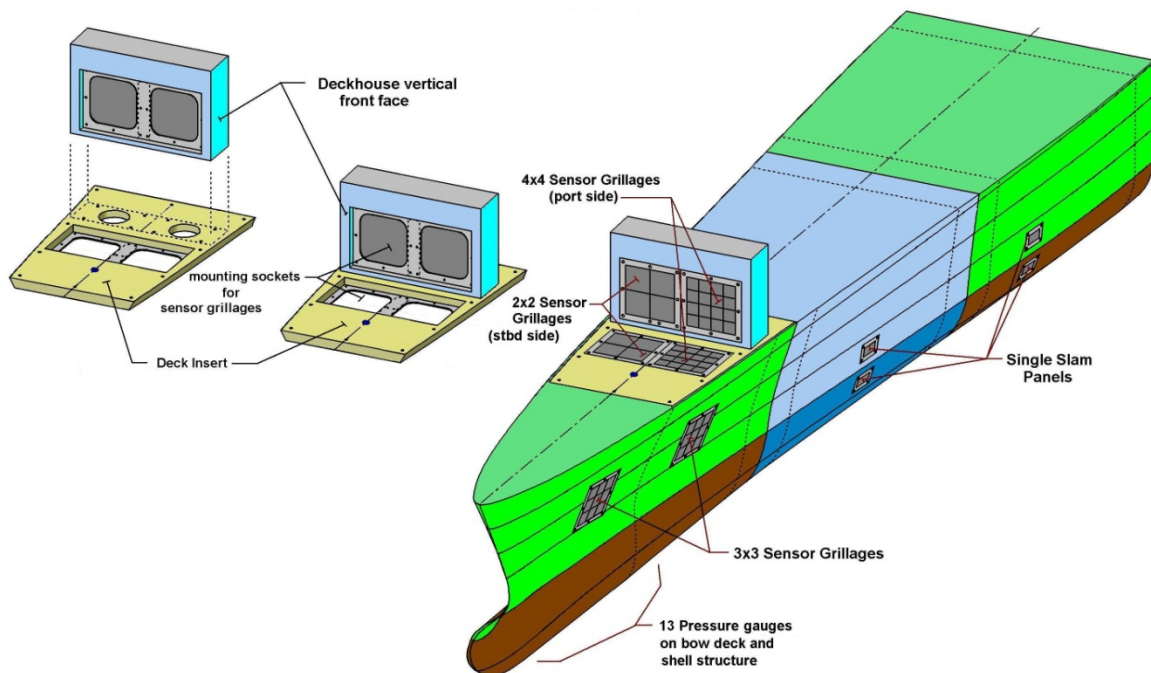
Deckhouse and Slam Grillage Details for JHSS Segment 1 Insert
